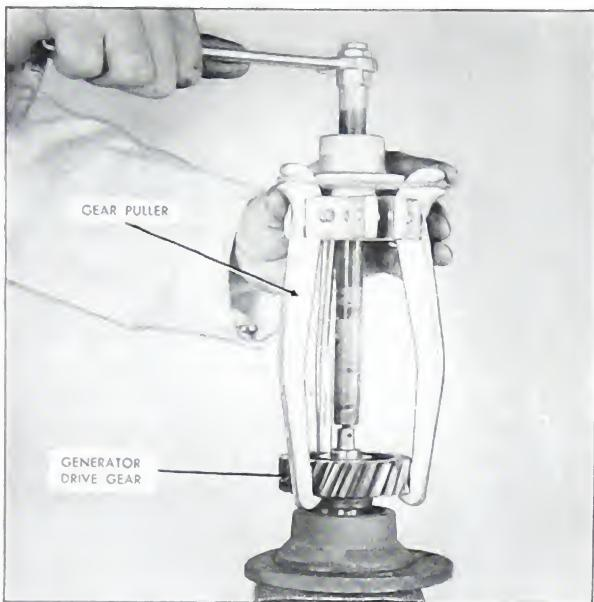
Pulling generator drive gear from the bearing and cage.
